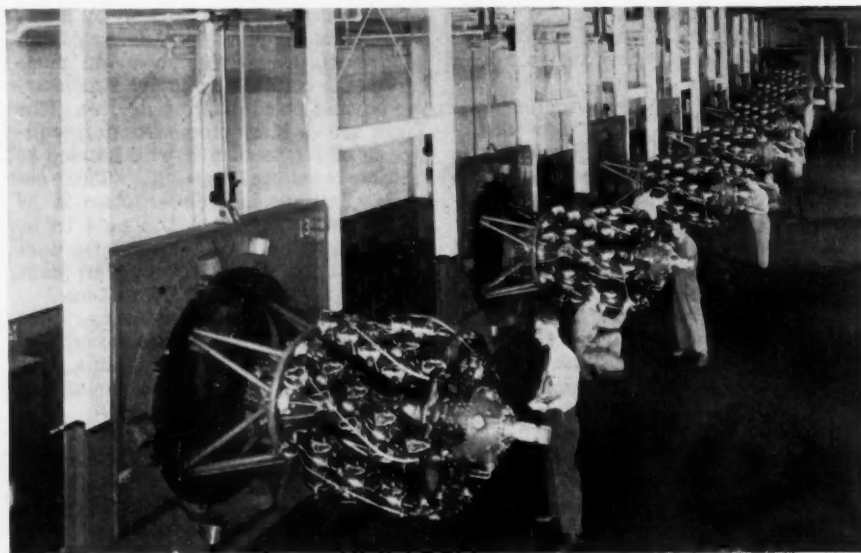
Pratt & Whitney helps speed its test cell operations by using these preparation stands, equipped with push-button controls for raising, lowering, and rotating the engine
